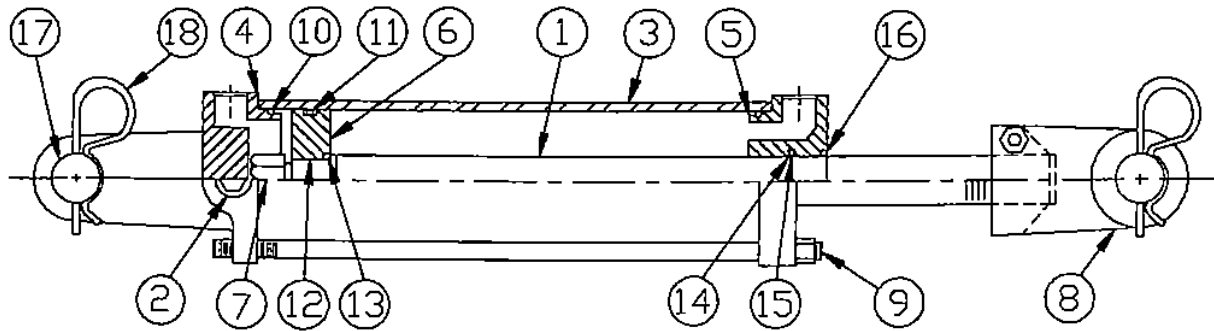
HYDRAULIC CYLINDER COMPONENTS
